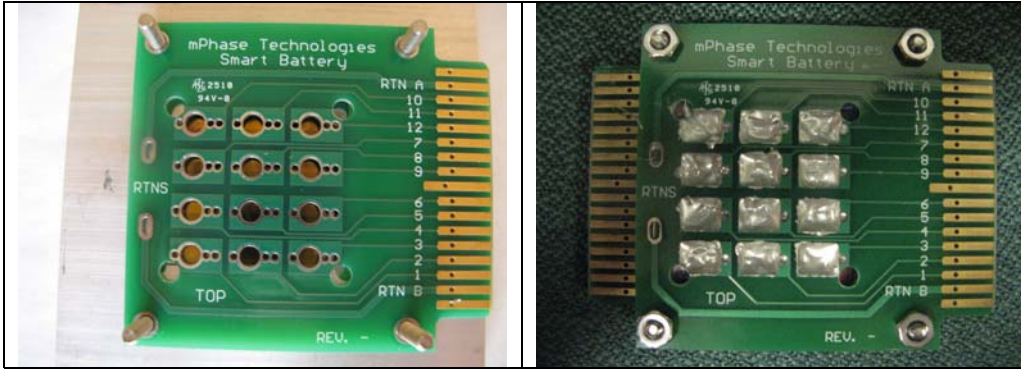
Printed circuit board mounted using battery alignment jig. Completed sample, 3x4 multi-cell batteries with attached top and bottom circuit boards. Battery is sandwiched between circuit boards.
